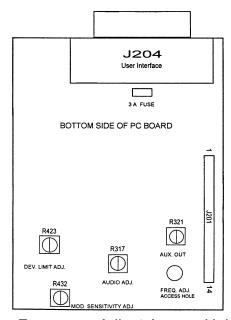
JDT Transceiver Frequency Adjust Access Hole Location (Cover Removed)
